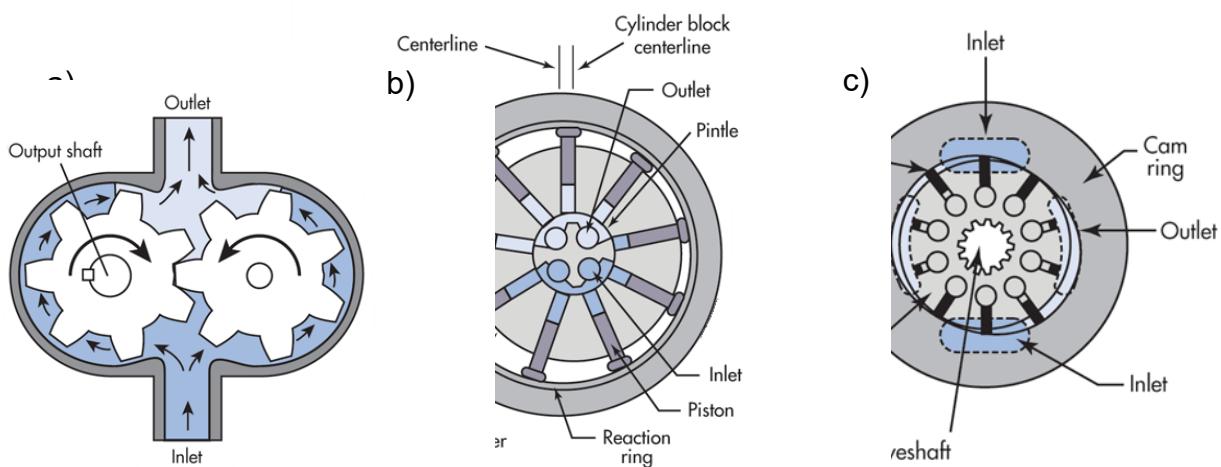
Basic types of hydraulic motors depending on the type of construction: a) gear motor, b) vane motor and c) piston motor [2].
